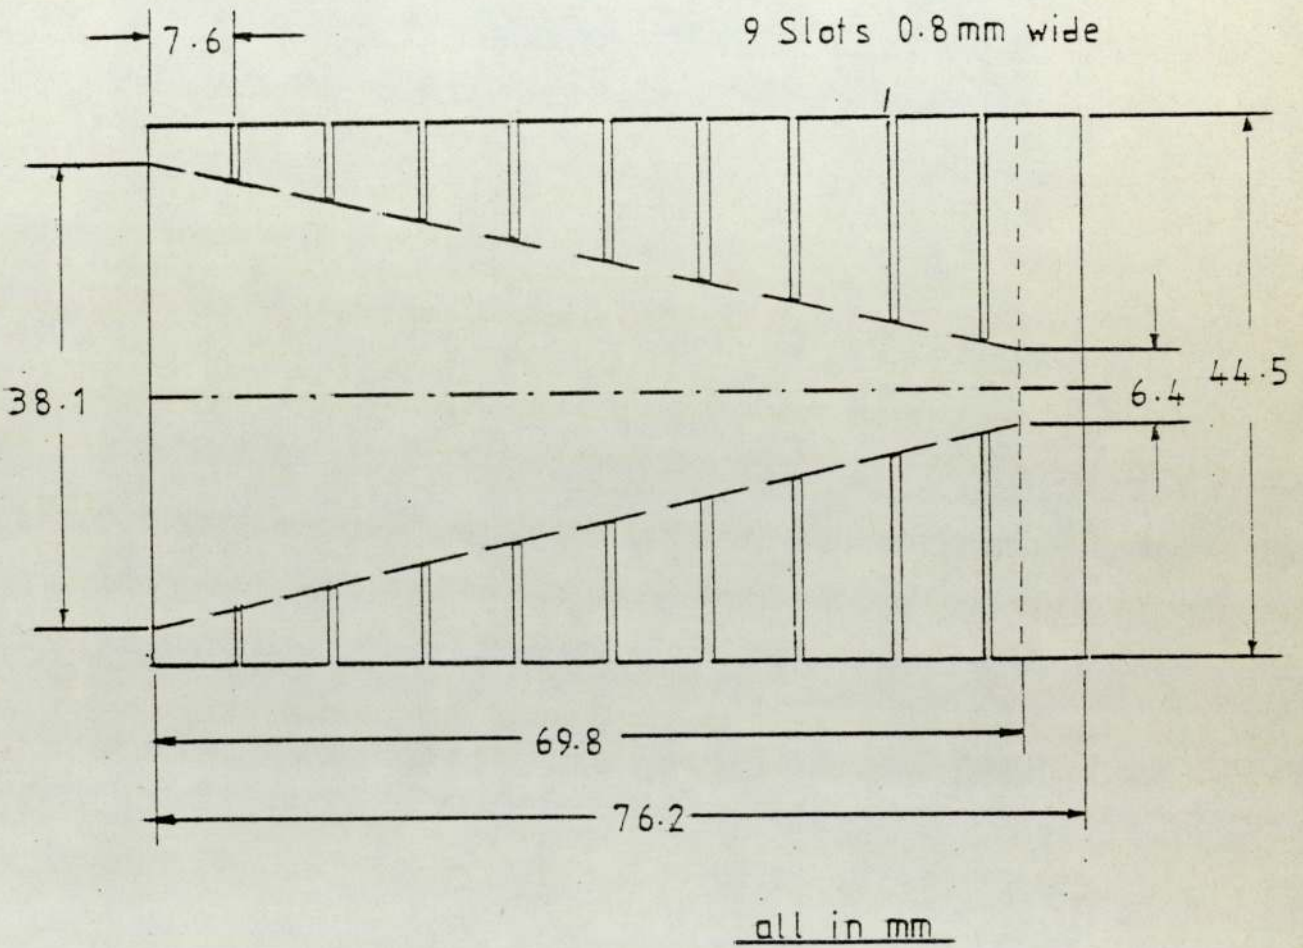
Specimen used for the Houldcroft cracking test<sup>54)</sup>.
